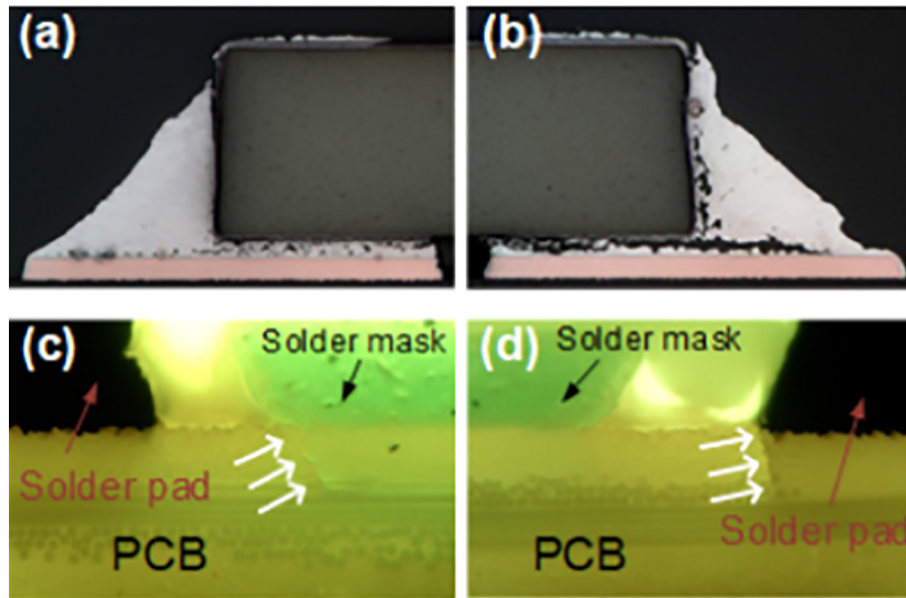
Cross-sections of the solder joints to a thermally cycled resistor showing a–b) cracks in the two solder joints and c–d) cracks in the PCB laminate.
